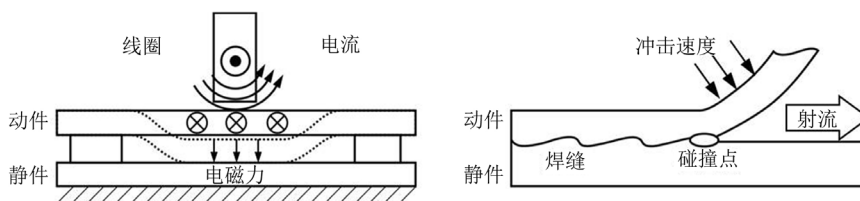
The schematic of magnetic pulse welding for sheet metal
